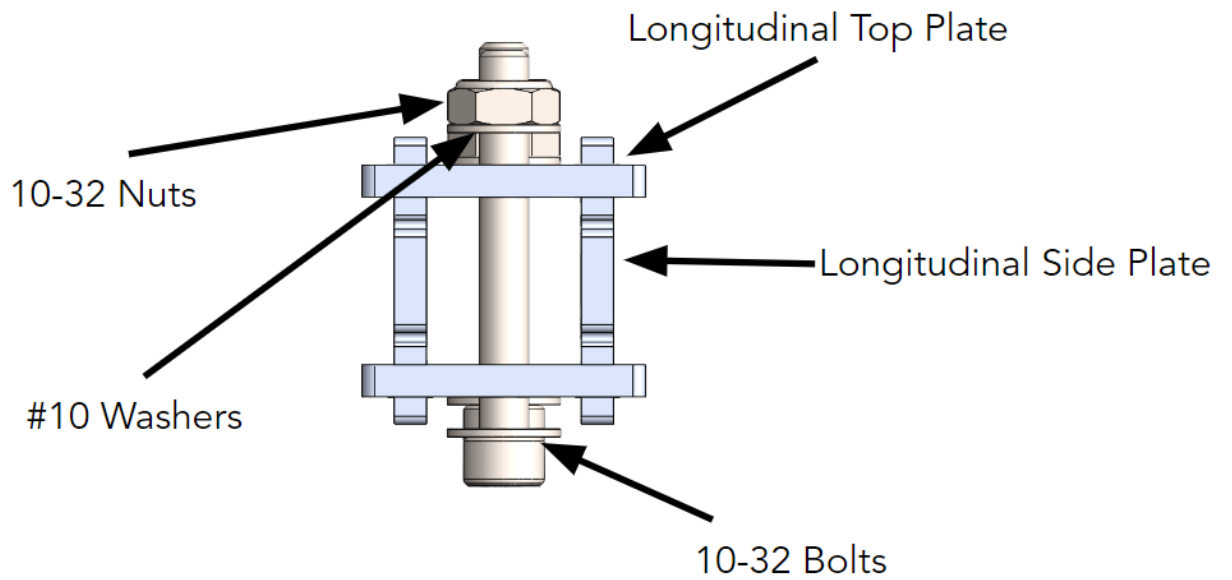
Longitudinal Beam Kit Cross Section (10-32 Preloaded Bolt)
